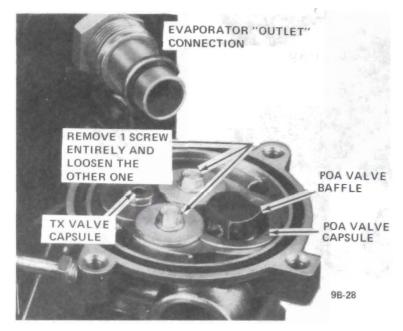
B-32 VIR Assembly with Inlet Connector Shell Assembly Removed
